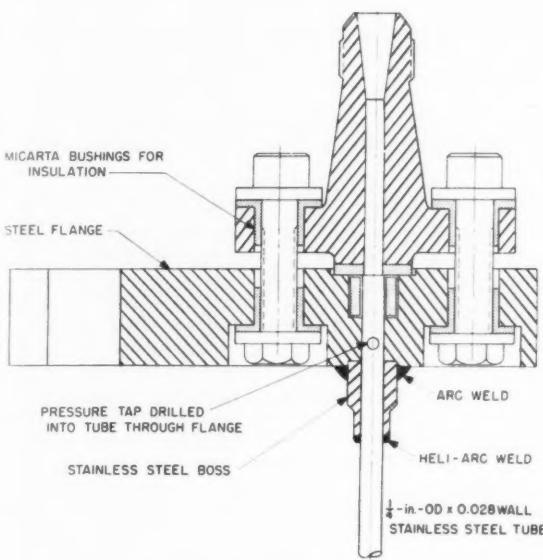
Assembly of tube and fluid flow adapter showing insulation
